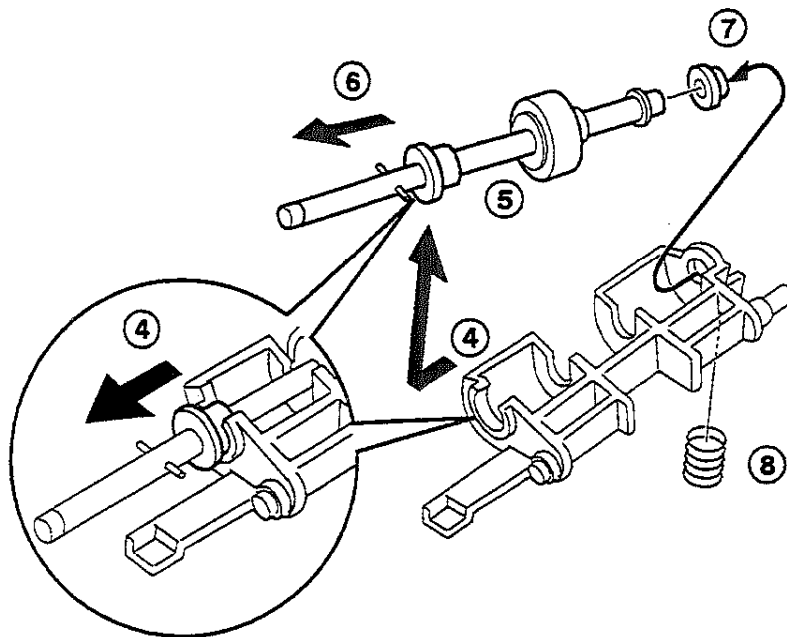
Retard Roll Assembly and Retard Main Spring Removal
